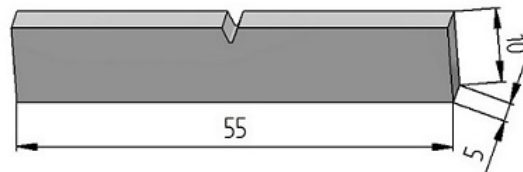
Geometry of the Charpy V-notch specimen, in mm
